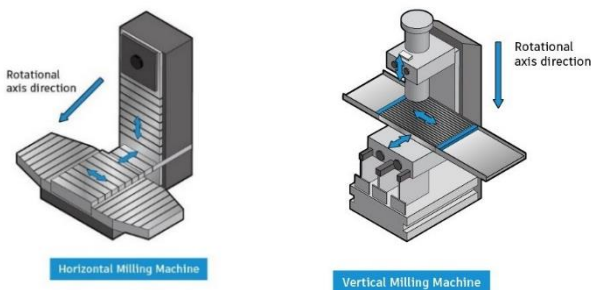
L: Horizontal milling machine; R: Vertical milling machine
